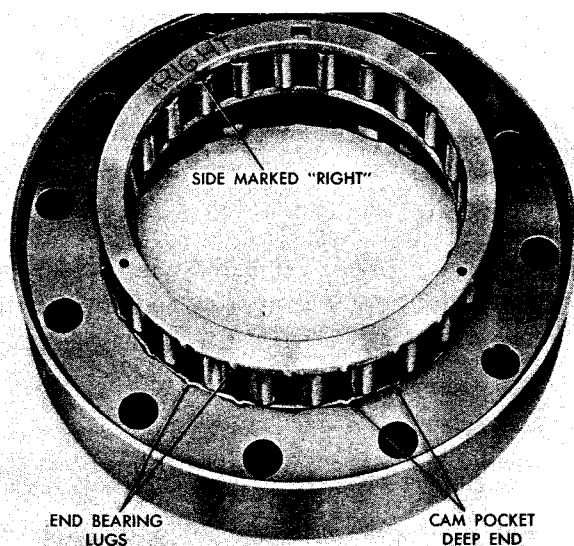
Installing roller cage and end bearings into cam (in units with S/N 101 through 151)
